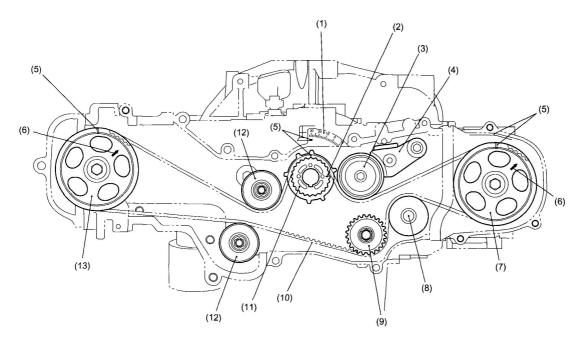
Sectional View Of Engine Assembly Courtesy of SUBARU OF AMERICA, INC.
